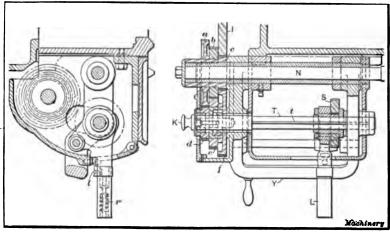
Sectional Views of Quick Change-gear Mechanism
